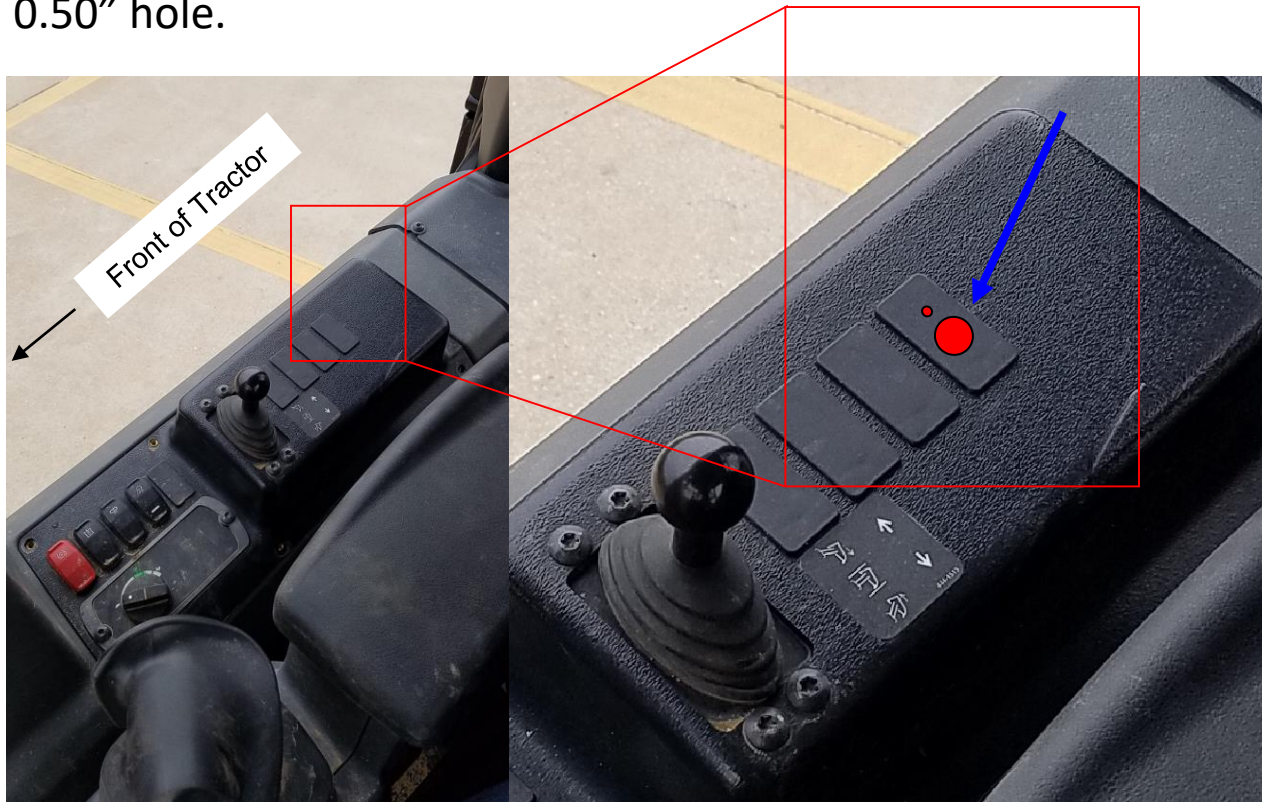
Remove the screws to remove plastic console cover. Check for clearance to wiring before drilling holes
